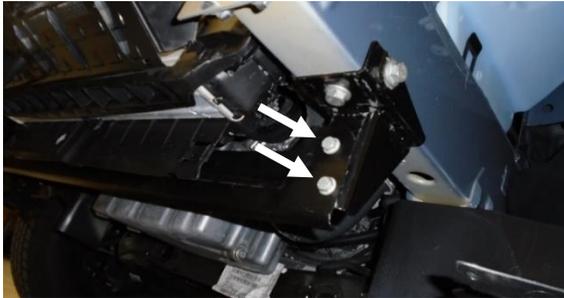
Mounting Location on Vehicle of Mounting Brackets
